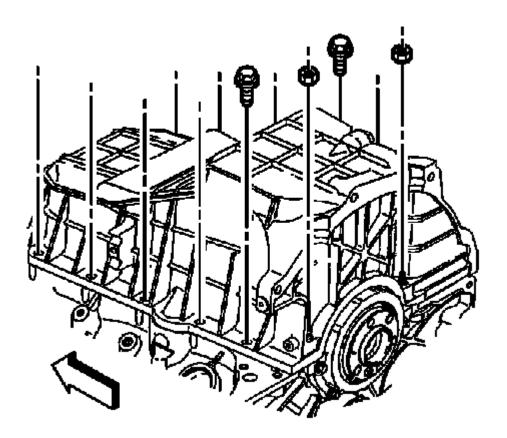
View Of Oil Pan Bolts & Nuts Courtesy of GENERAL MOTORS CORP.
